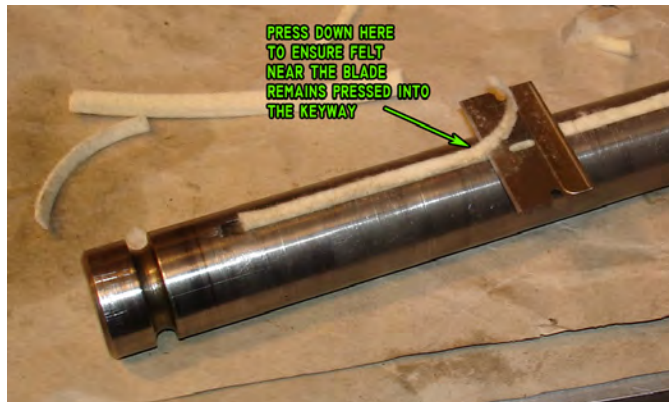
Method of installing new felt in gearbox shafts. The input shaft is shown, but other shafts are done the same way.
